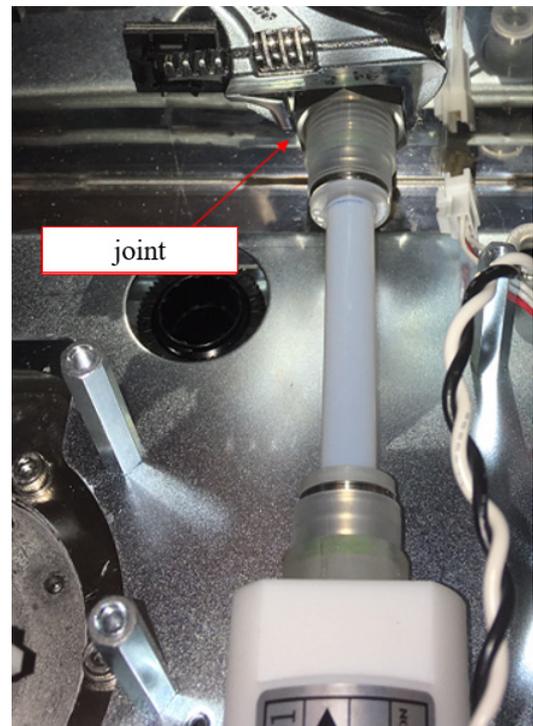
Remove the joint (C) using a Monkey wrench.
